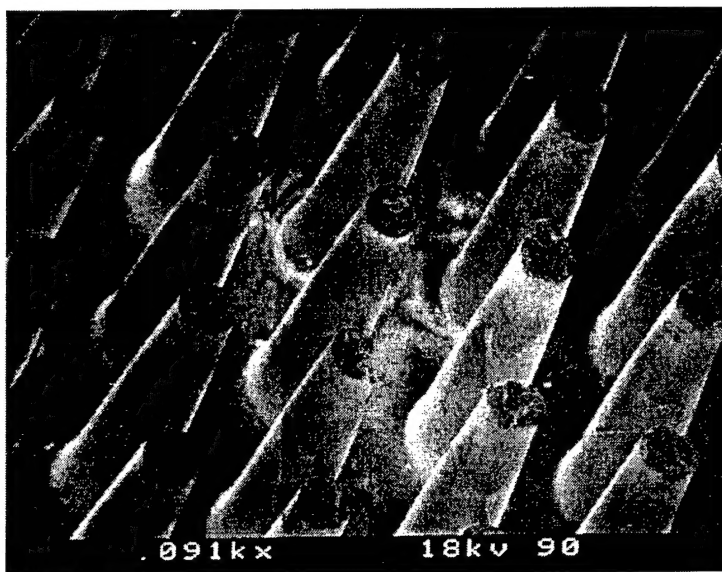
SEM micrograph of as-molded PZT rod array showing the taper and smooth surface finish of green rods.
